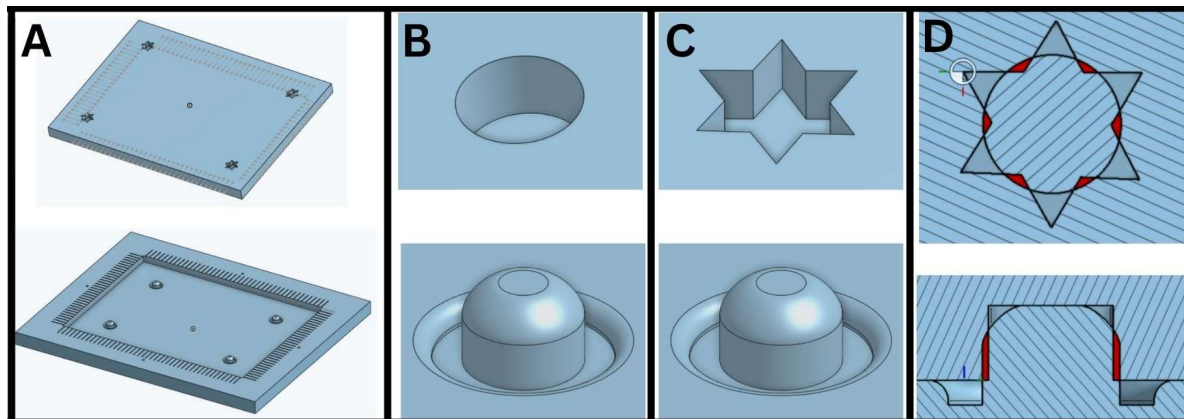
A) Isometric view of the top of the bottom plate (top) and the bottom of the top plate (bottom). B) Circle hole (top) and rounded post with moat (bottom). C) Star-shaped holes (top) and rounded post with moat (bottom). D) Cross section of post inserted in star hole, the areas in red show the contact points designed to erode where the parts overlap. Horizontal cross section (top), vertical cross section (bottom)
